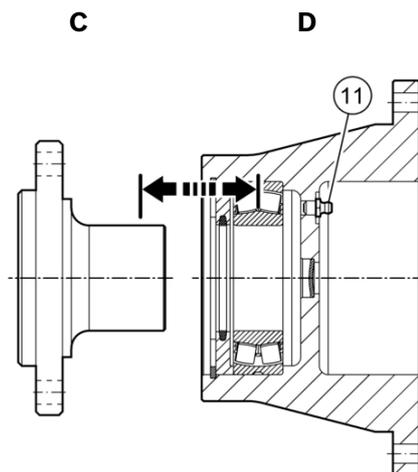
Counter-bearing with spherical roller bearings, consisting of part C and part D
